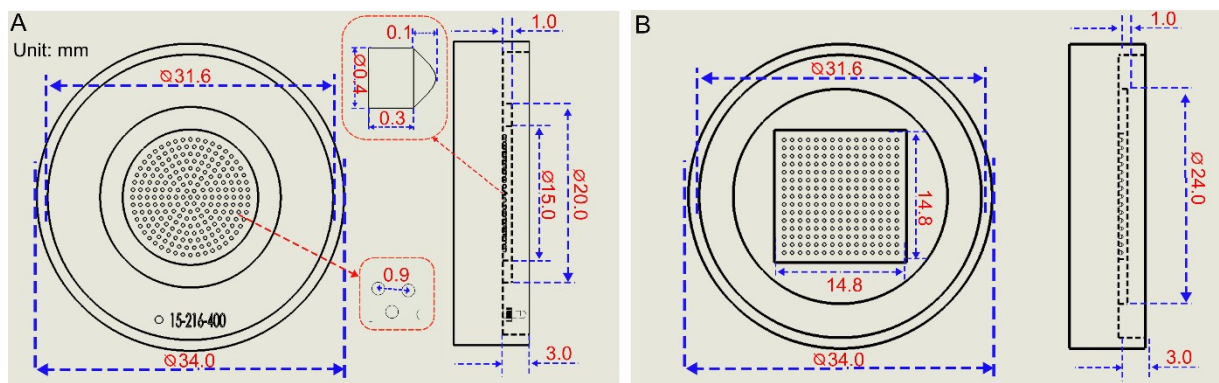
Engineering drawings of the round-array mould and the square-array mould.
